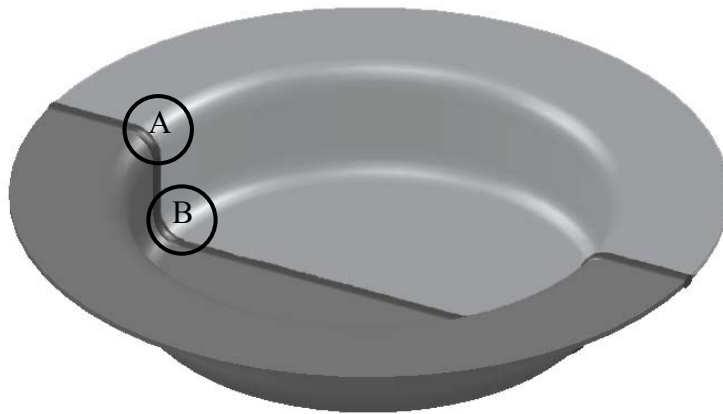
Bimetal Fe-Al brazed stamped plate.
